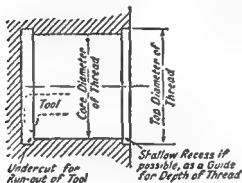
Preparation of Hole for Blind Internal Thread.
